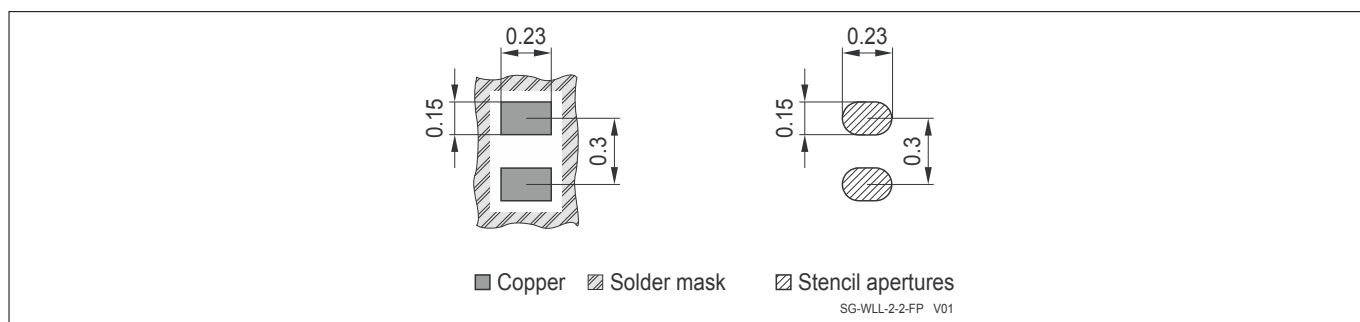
WLL-2-2 footprint (recommendation for printed circuit board assembly see [2])
